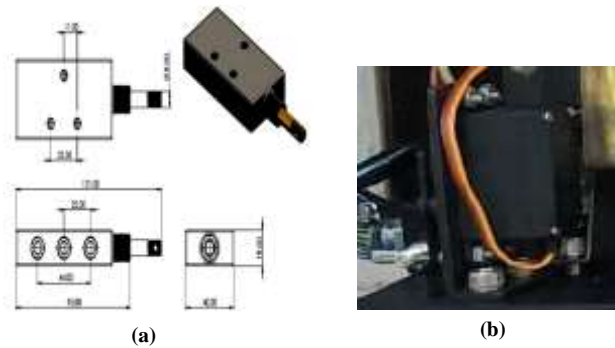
(a) Hydraulic Valve Design; (b) Hydraulic Valve Arm Backhoe.
